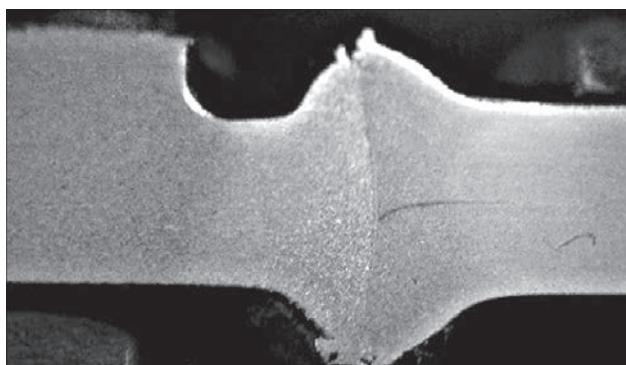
Macrosection of welded joint of the pipe and bottom of 120 \times 7.5 mm diameter
